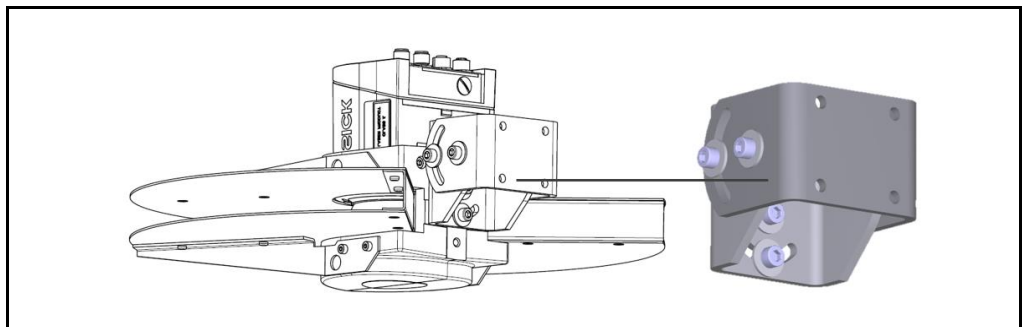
LMS111 laser scanner with mounting kit and weather hood
